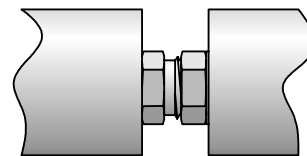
F5OHAO for close coupling of components with two SAE Straight thread ports
